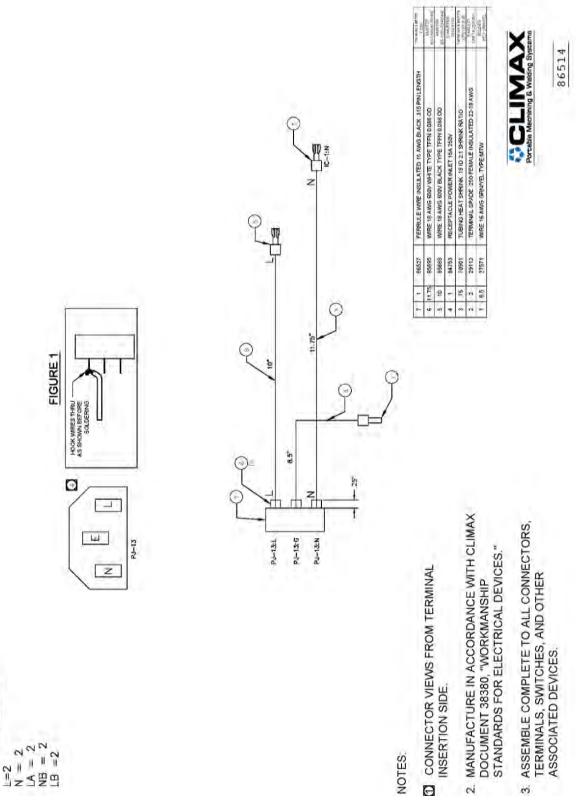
POWER ENTRY MODULE ASSEMBLY (P/N 86514)
